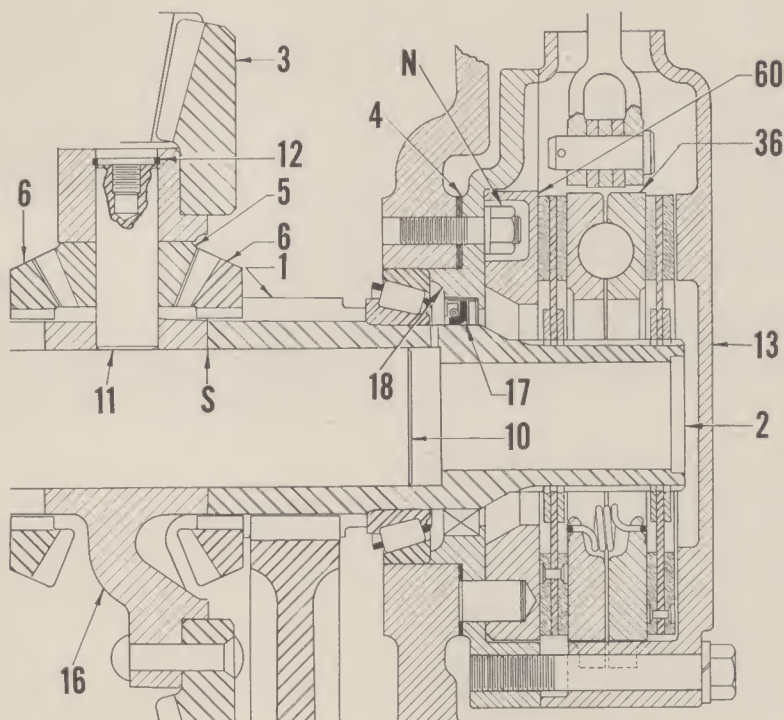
A—Section through bull pinion and disk brakes on one side of 6 speed tractor. Brakes are adjusted by turning nut (A) shown in Figs. 0603A, 0611.
